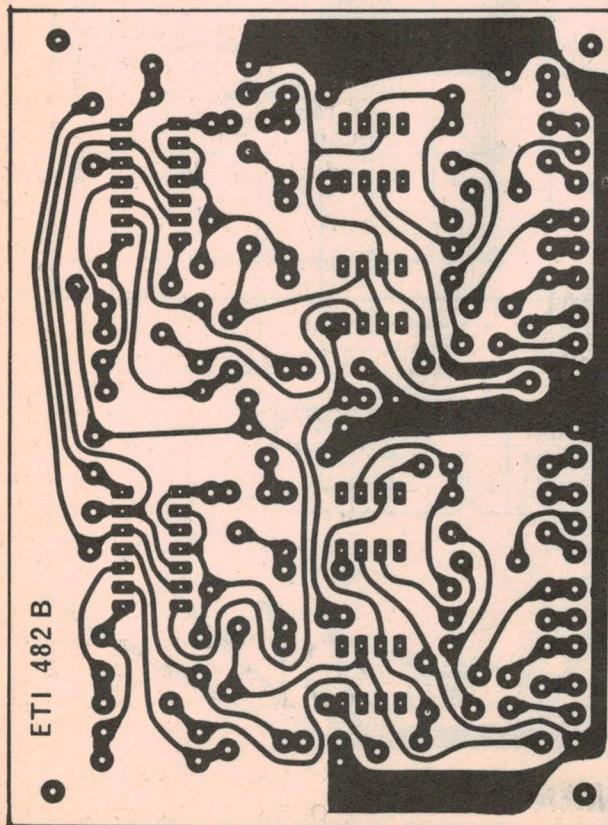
Printed circuit layout of the tone control board. Full size 110 x 80 mm.
